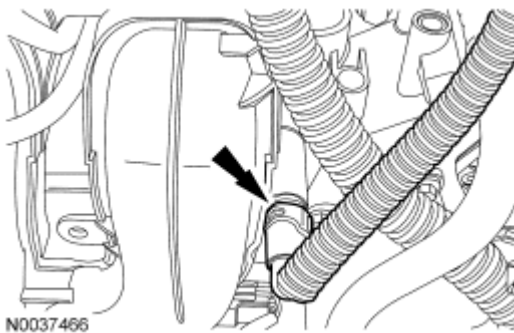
Locating Evaporative Emissions (EVAP) Tube From Intake Manifold
